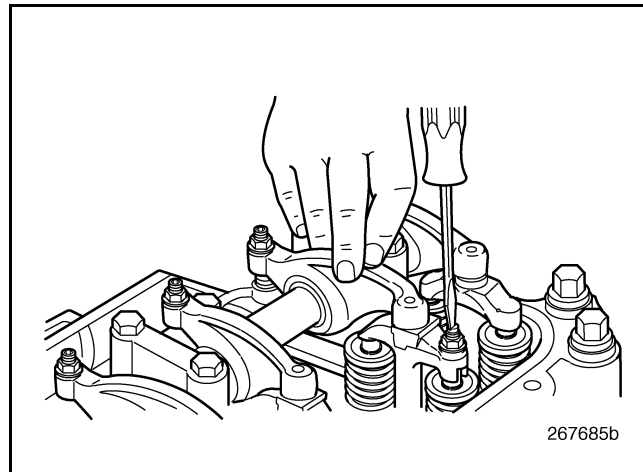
Turning Yoke Adjusting Screw Until It Contacts Valve Stem
